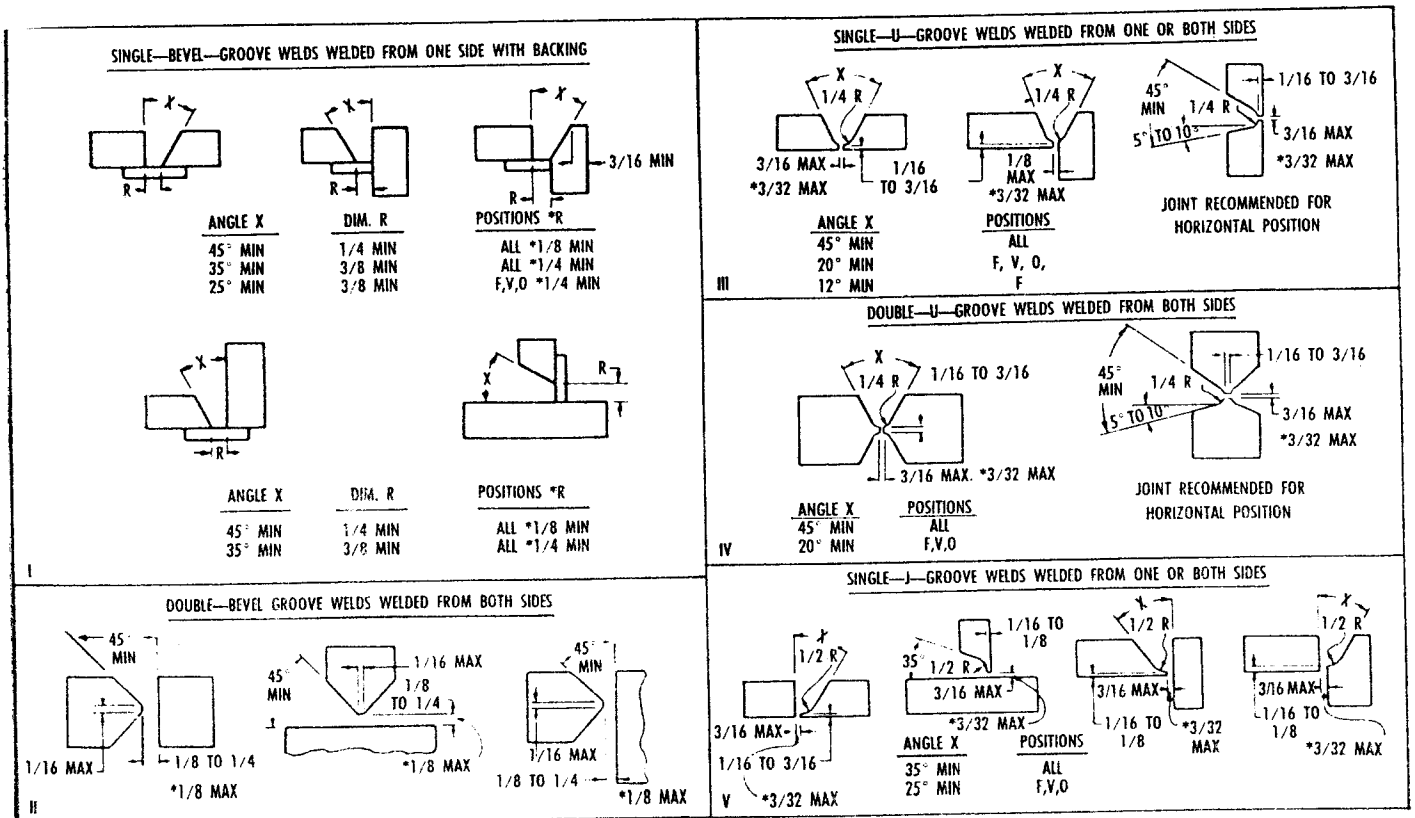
Recommended proportions of grooves for shielded metal-arc, gas tungsten-arc, gas metal-arc, flux-cored arc and gas welding (except pressure gas welding). Note: Dimensions marked \* are exceptions that apply specifically to designs for gas metal-arc welding (34).
